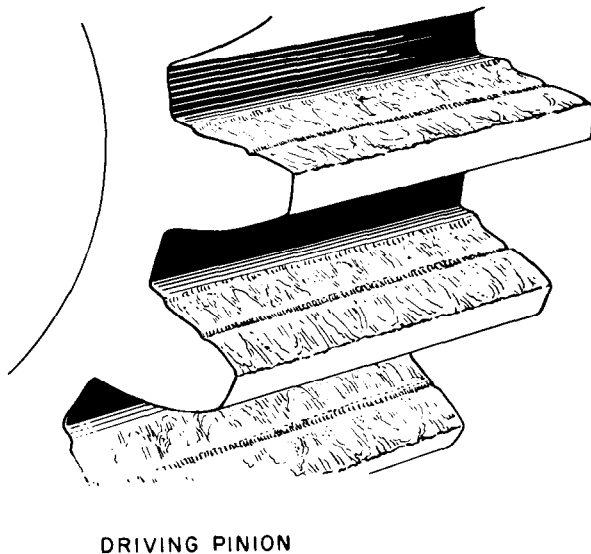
Advanced Galling*. Consistent failure of the lubricating film may cause not only localized yielding and displacement of the metal, but also a pressure-welding or seizure between the engaged surfaces. When such welding occurs, chips and scales of metal tear from the teeth, and the working surfaces become roughened. Scoring, abrasion and excessive wear then follow.
